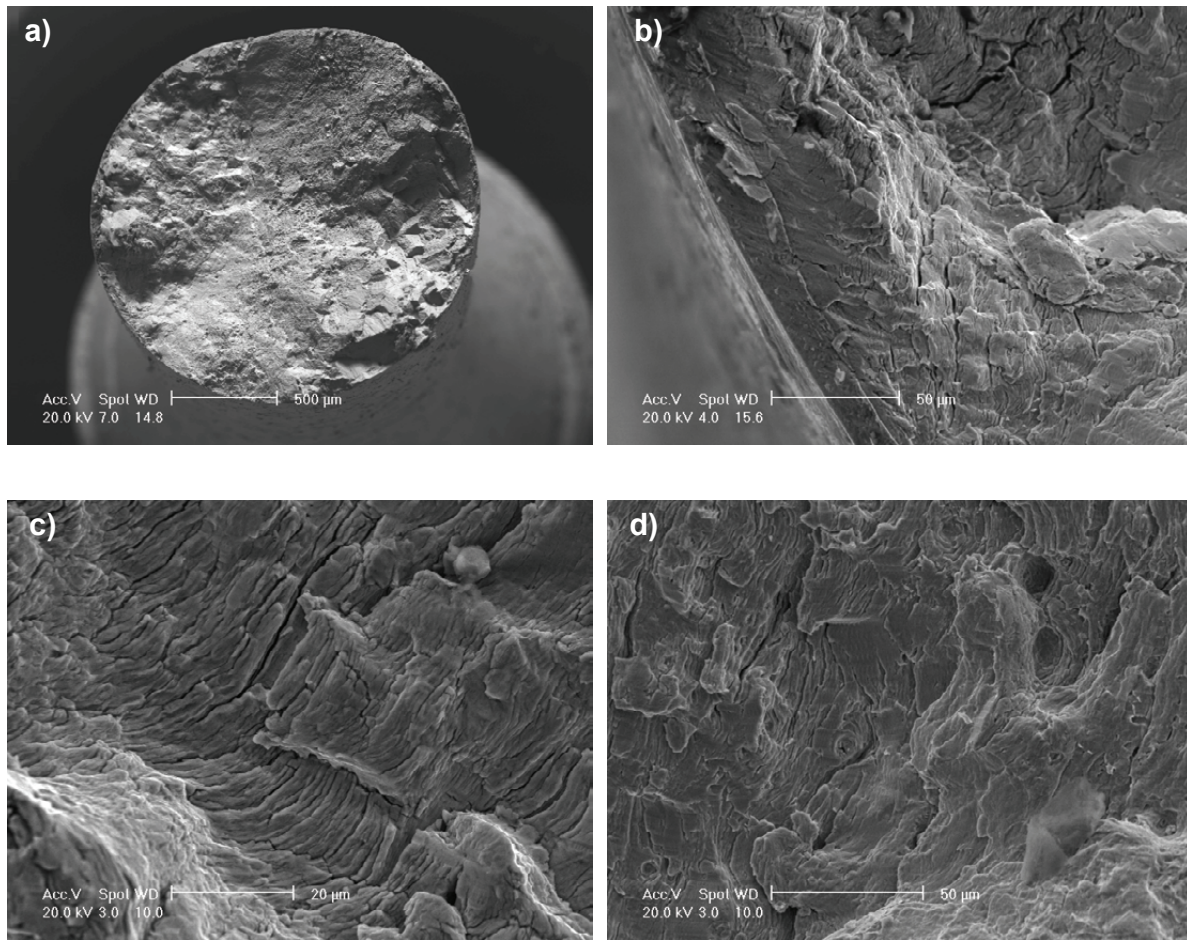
SEM micrographs of F 16 (47 dpa/ 337 °C) after LCF test at $\Delta\epsilon_{\text{tot}} = 1.1\%$ at 330 °C: a) an overall view; b) fracture appearances close to the specimen surface; c) fracture appearances in the middle area of the fatigue crack propagation; d) fracture appearances close to the end the fatigue crack propagation.
